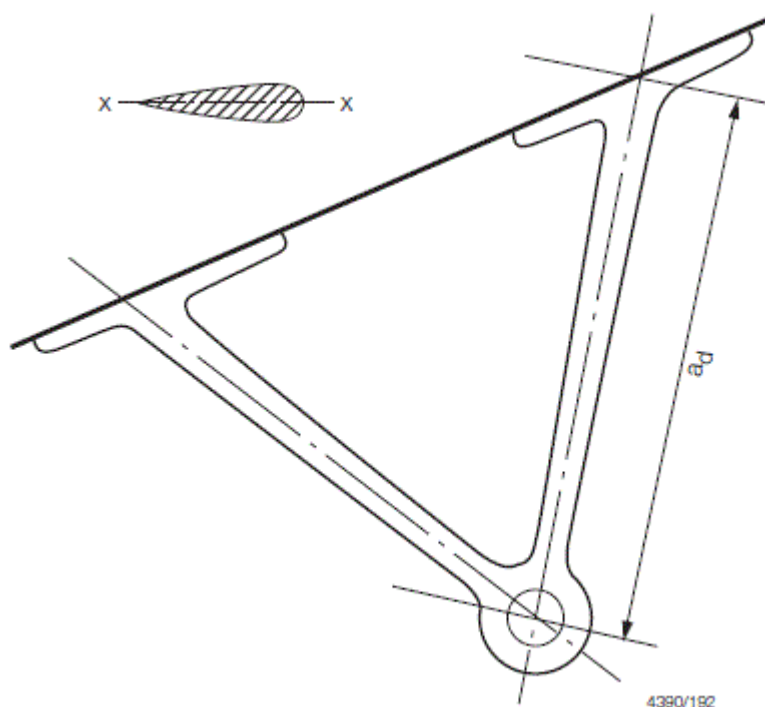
Double arm shaft bracket (bolted attachment)
